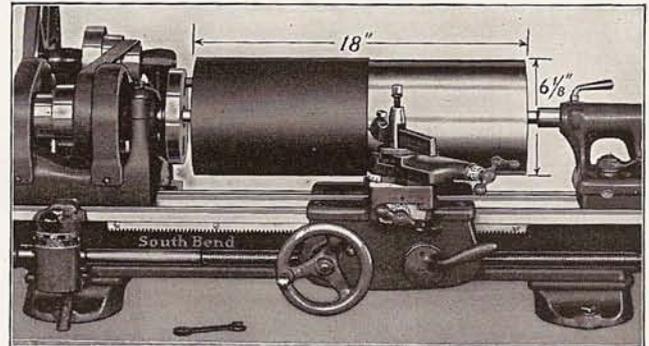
The 9" x 3" "Workshop" Lathe Will Handle a Steel Roll $6\frac{1}{8}$ " in Diameter and 18" Long, between Centers. See table below.
